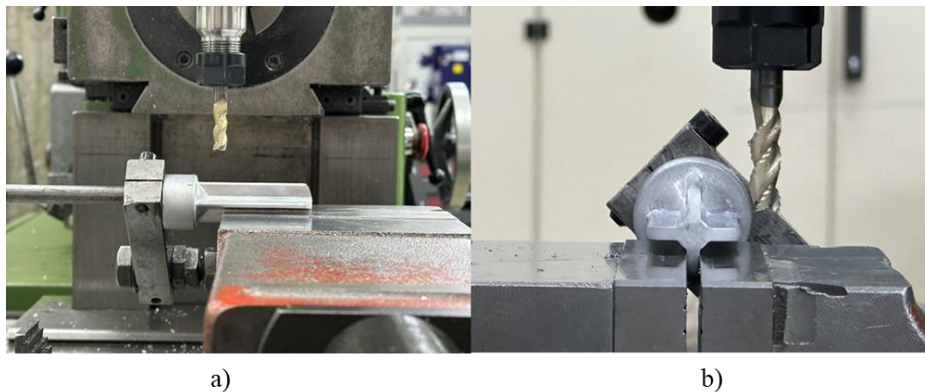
Milling setup with workpiece clamping. Side view (a) and front view (b).
